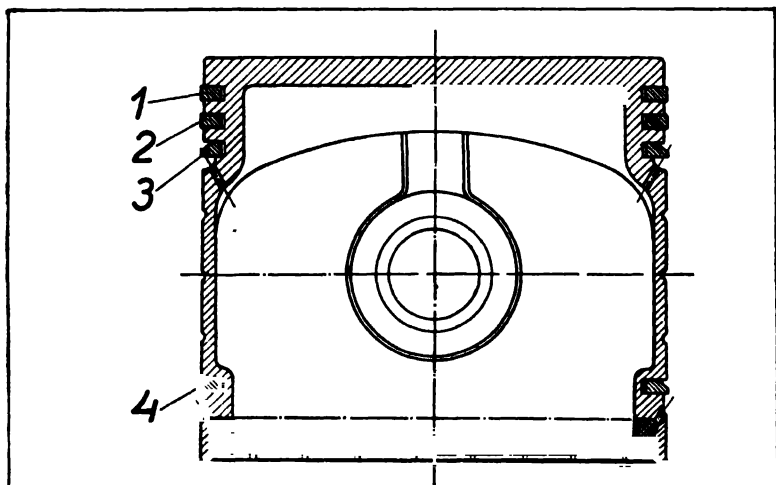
Sectional Drawing of Piston, Showing Proper Arrangement of Piston Rings. Note that Rings Nos. 3 and 4 are Bevelled and are Installed with the Bevel Uppermost.
